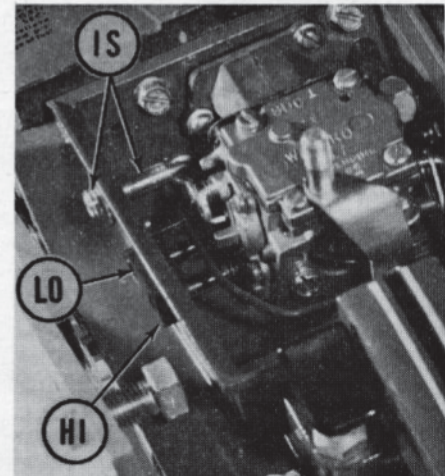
View with air filter removed showing carburetor adjusting points. Early model air box and idle speed screw have 5/16-18 thread; late models have 5/16-24 thread for more accurate idle speed adjustment.
